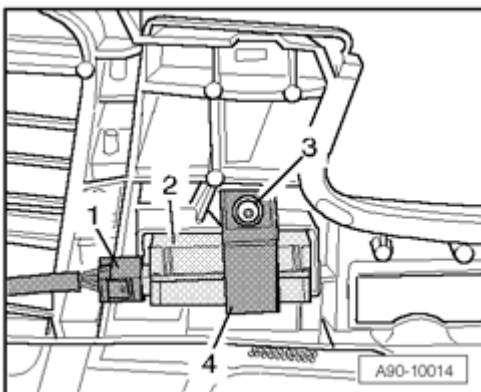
Identifying Bolt, Harness Connector, And Garage Door Opener Control Module
